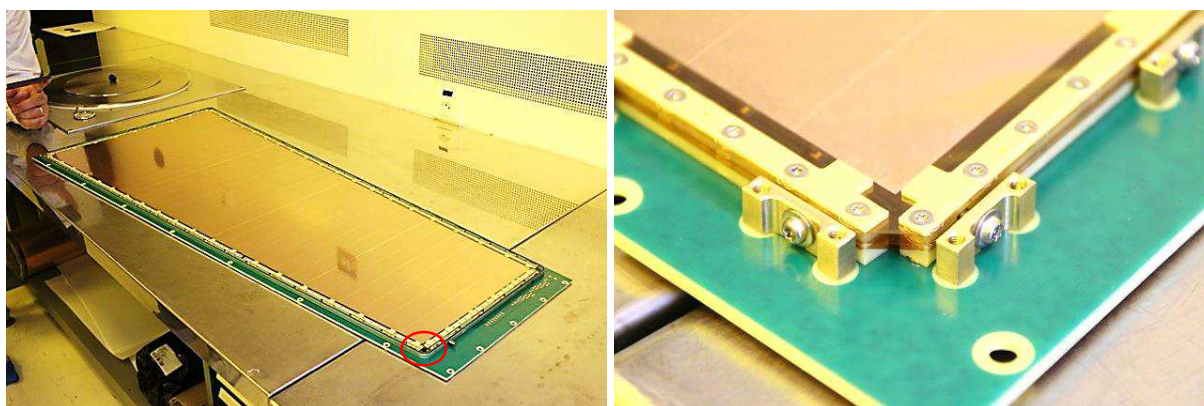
GE1/1-V prototype with GEM foil stack tensioned against brass pull-outs, mounted onto drift board, and surrounded by outer frame (left). The clear optical reflections in the top foil indicate that the stack is uniformly taut. The active chamber volume is now ready to be closed with the readout board. To help with scale reference, one of the editors (LB) of this chapter is lending a hand. A detail (red circle) of the stack is given that shows the gap between inner frame sections in one corner and the pull-outs (right).
